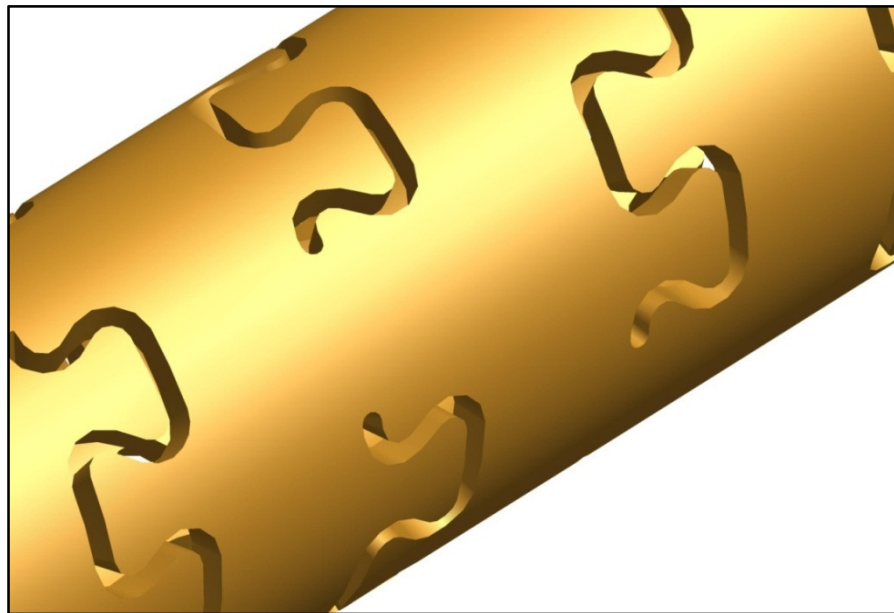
LASER CUT PATTERN ON GUIDE TUBE
